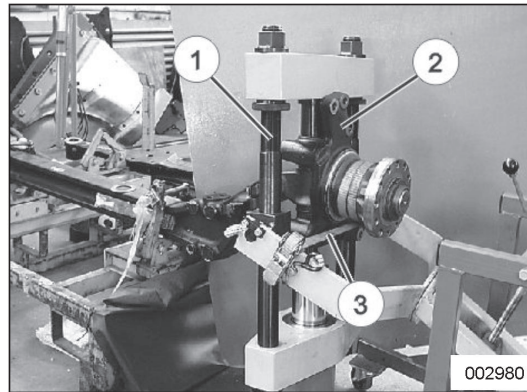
Steering knuckle assembly (maintenance-free king-pin)
